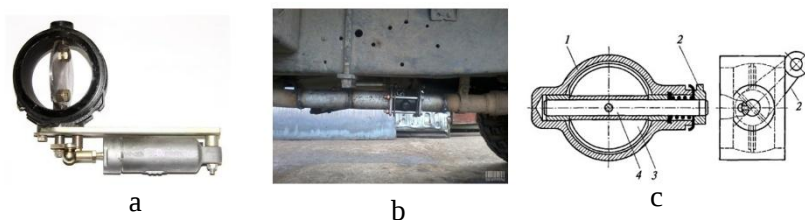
Motor brake: kind of a motor brake with a shutter and the pneumatic cylinder of controlling (a); the motor brake established in the exhaust pipeline (b); the drawing of the case with a shutter: 1 – case; 2 – rotary lever of a shutter shaft; 3 – shutter; 4 – shutter shaft
